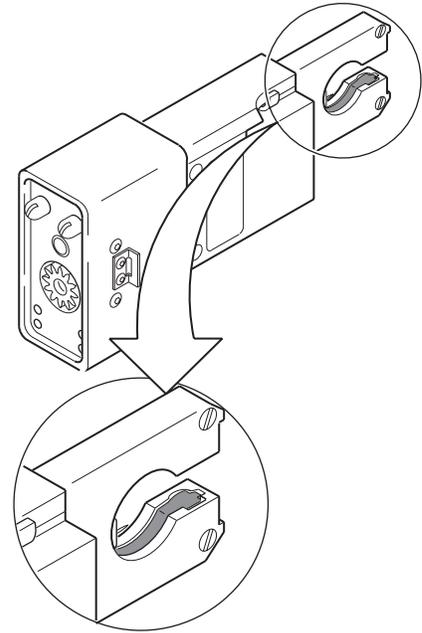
Inspect Exposed Surfaces of the Weld Head
